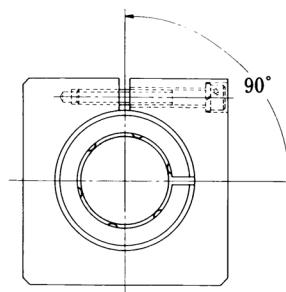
The ADJ-type fixing method makes adjusting the clearance possible.
